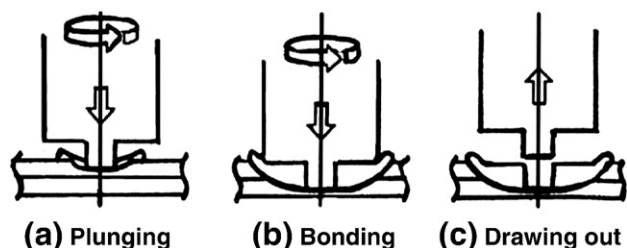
Illustrating fixed-pin spot friction weld (SFW) process [3].
